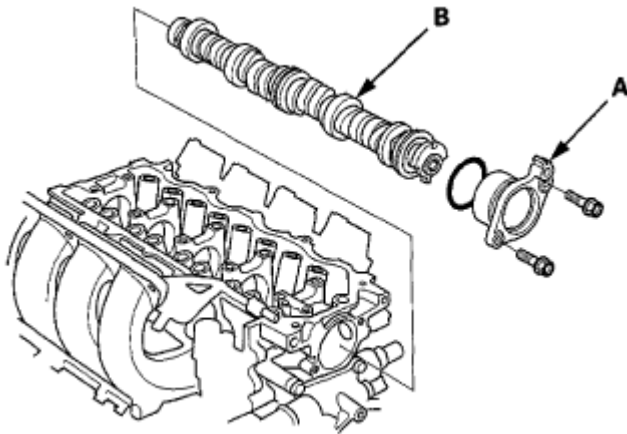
Locating Camshaft Thrust Cover And Camshaft
